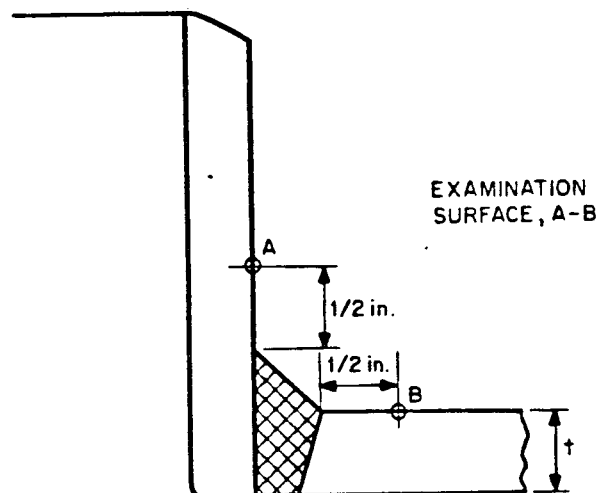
NOZZLE-TO-VESSEL WELDS
